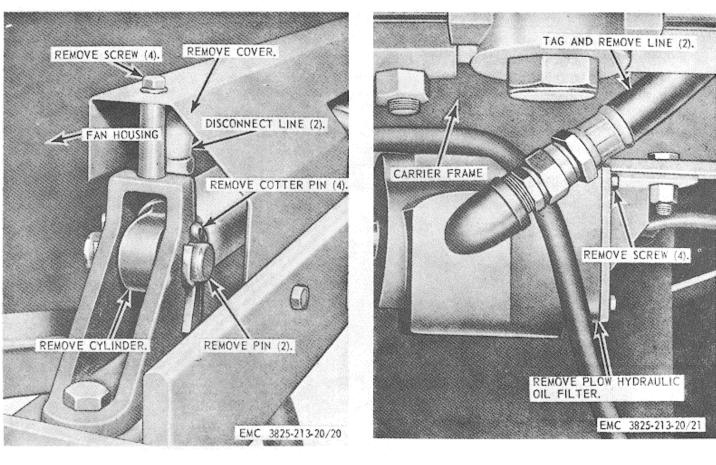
Fan housing hydraulic cylinder assembly, removal and installation.
